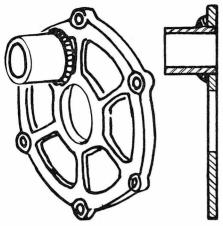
View of rotary valve cover showing method of installing tube for larger carburetor. Outside diameter of tube must fit carburetor and inside diameter of tube should match carburetor bore.
